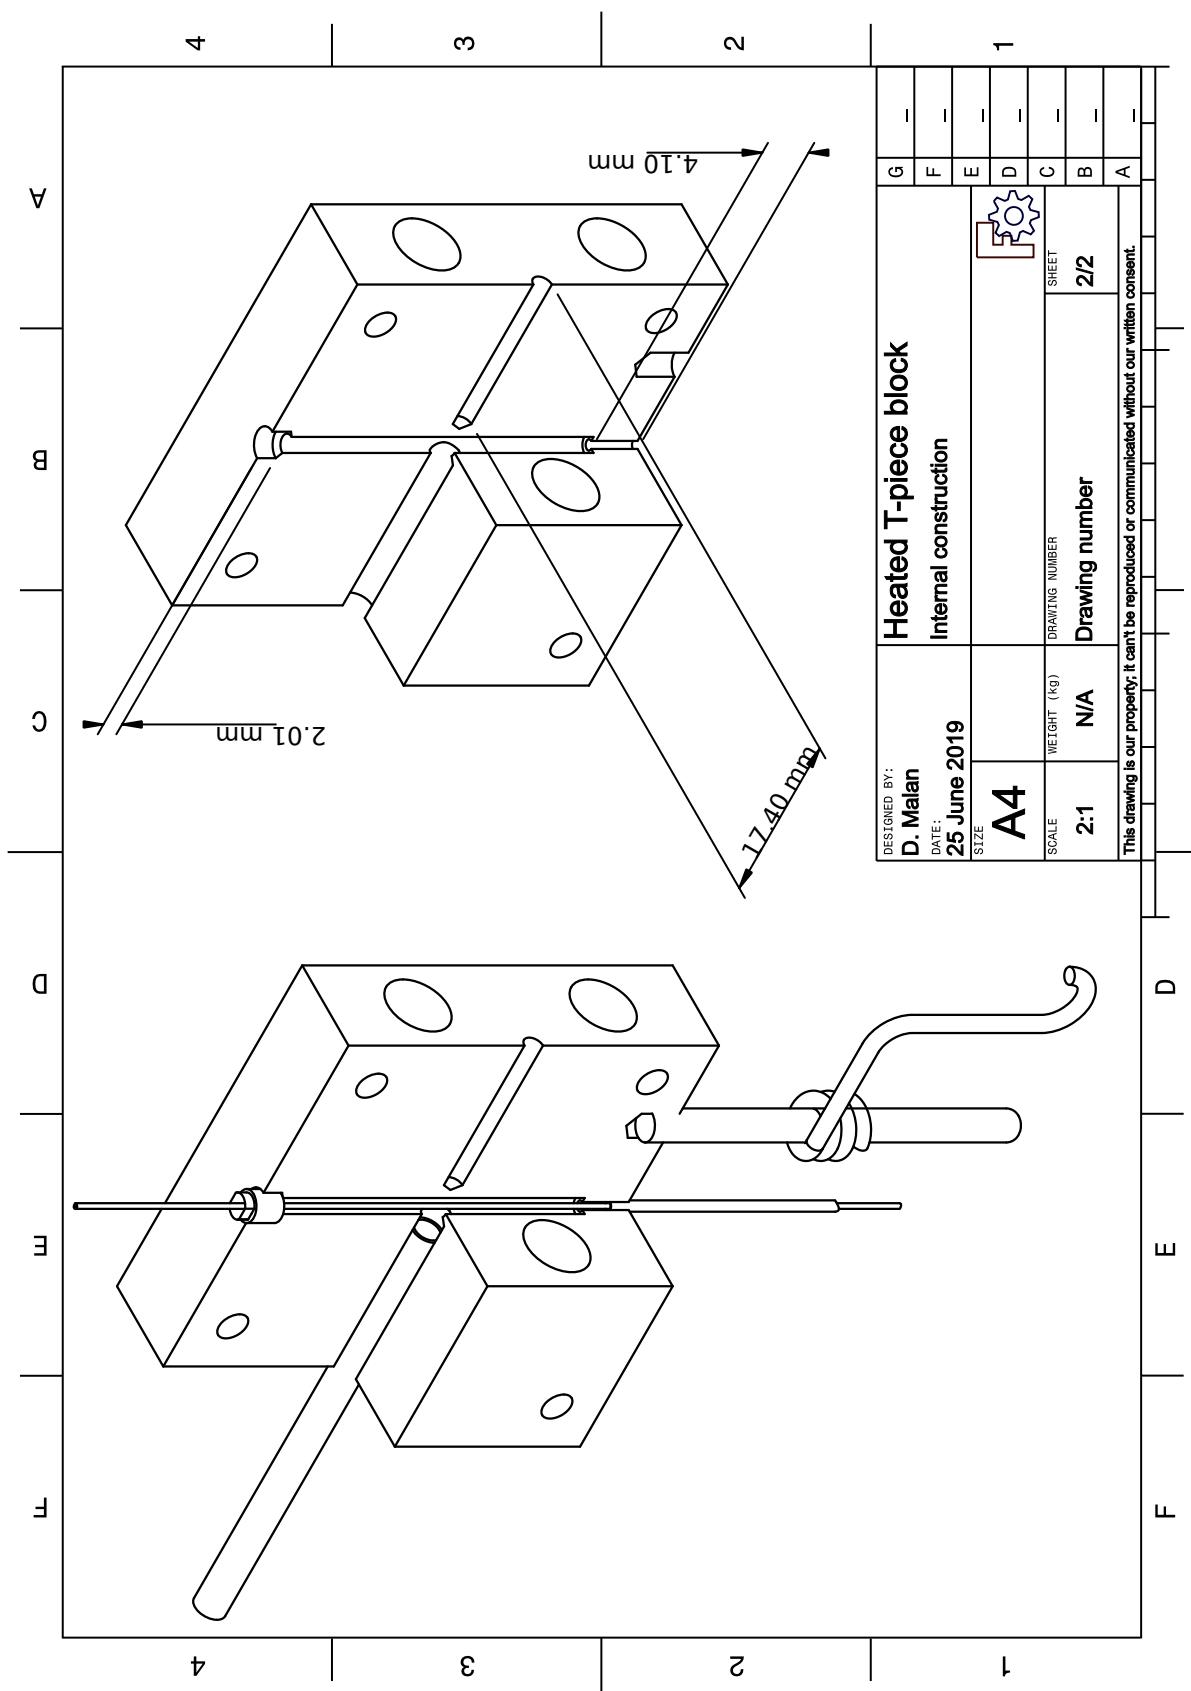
A technical drawings of the internal construction and assembly of the heated T-piece blocks.
